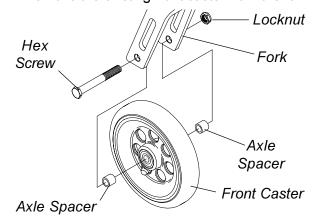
REPLACING/REPOSITIONING/ INSTALLING FRONT CASTER ASSEMBLIES
